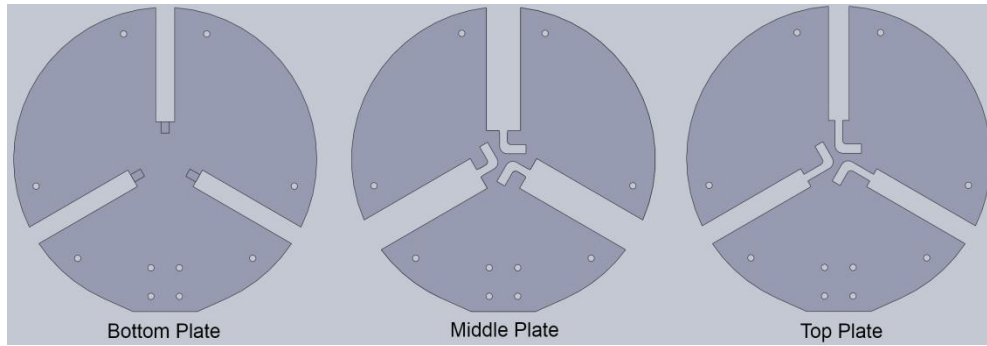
Profiles of the three plates that make up the main platform for the head release mechanism.
